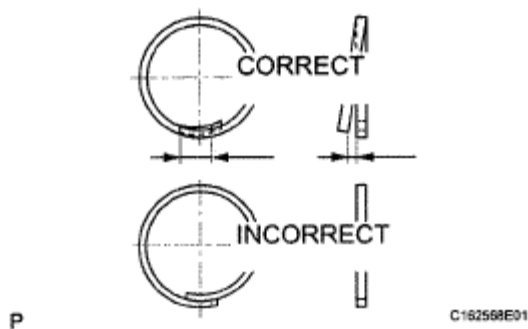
Identifying Oil Seal Ring Correct And Incorrect Position
